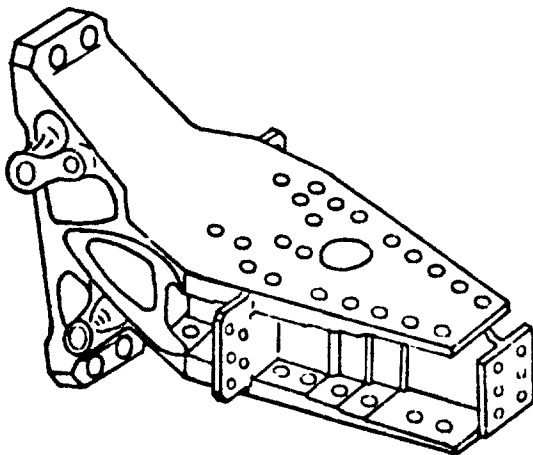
Wing-to-fuselage-fitting of an aircraft with critical bolt holes
